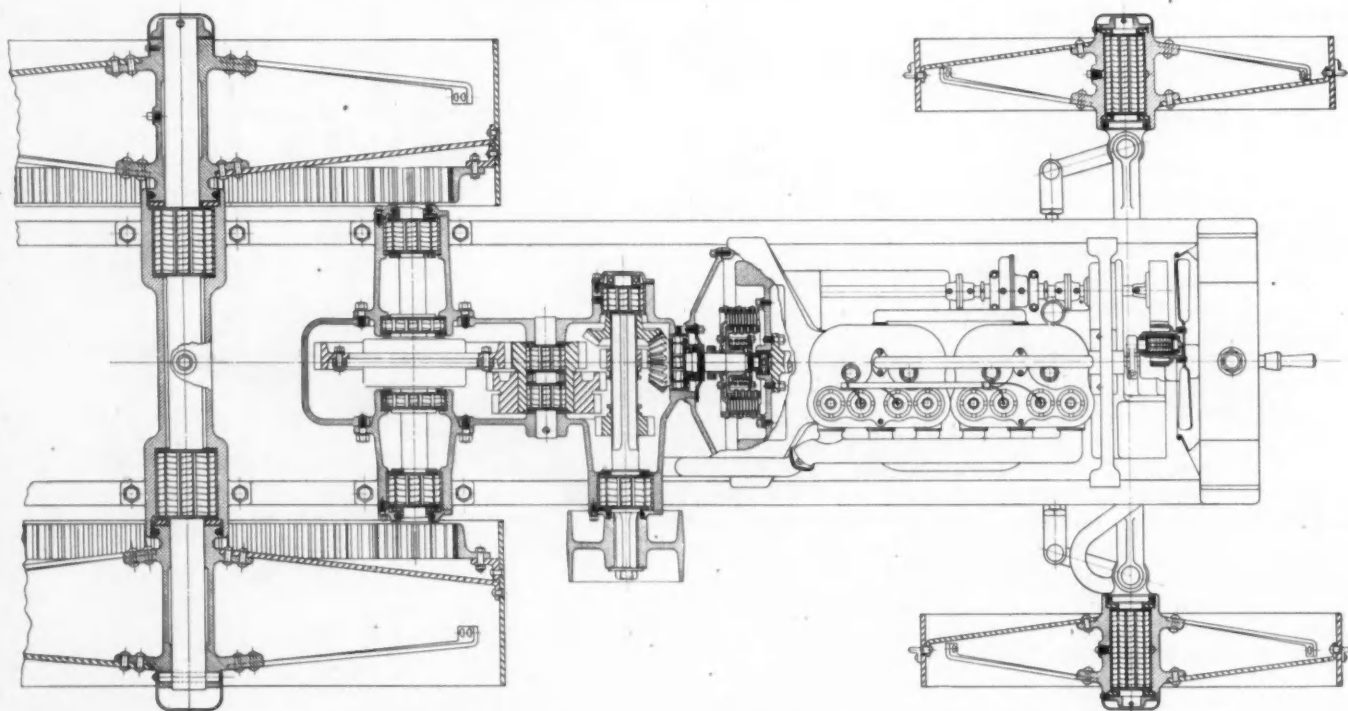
HYATT ROLLER BEARING COMPANY'S CONVENTIONAL TRACTOR BEARING LAYOUT
